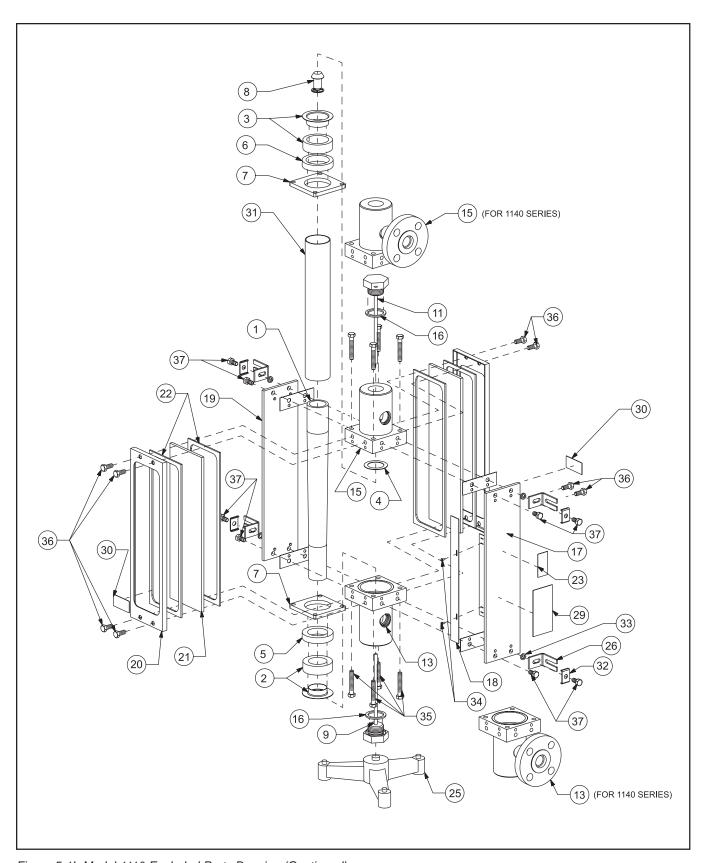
Model 1110 Exploded Parts Drawing (Continued)
